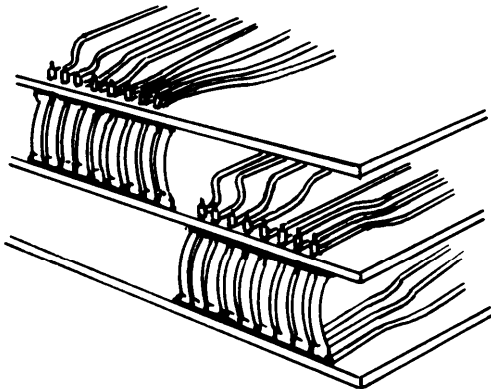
Flat Cable Used as a Jumper (Ref. 14)
